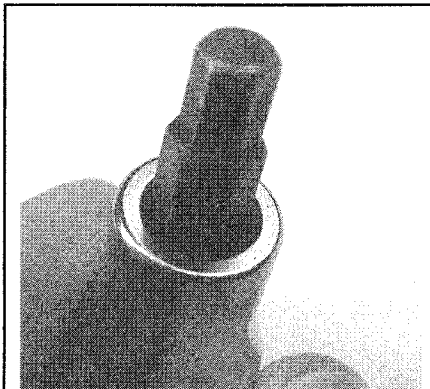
Hex-head fasteners require a socket with a hex shaped driver
